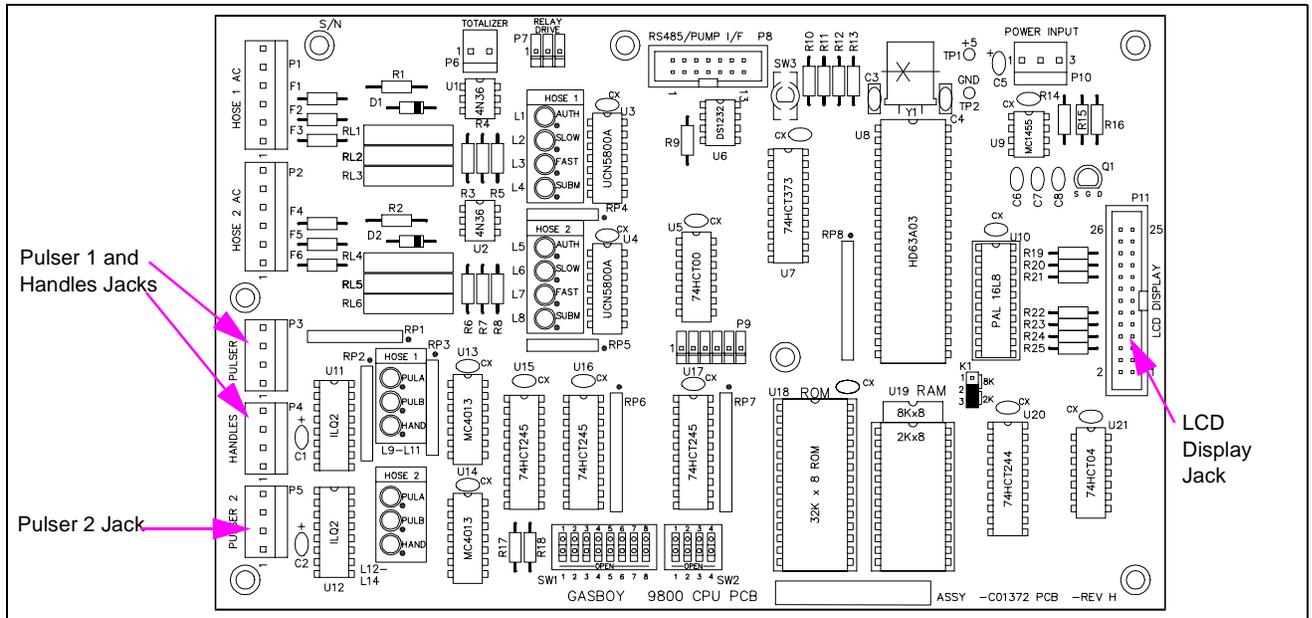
C06392 9800 CPU Printed Circuit Board (Drawing)
